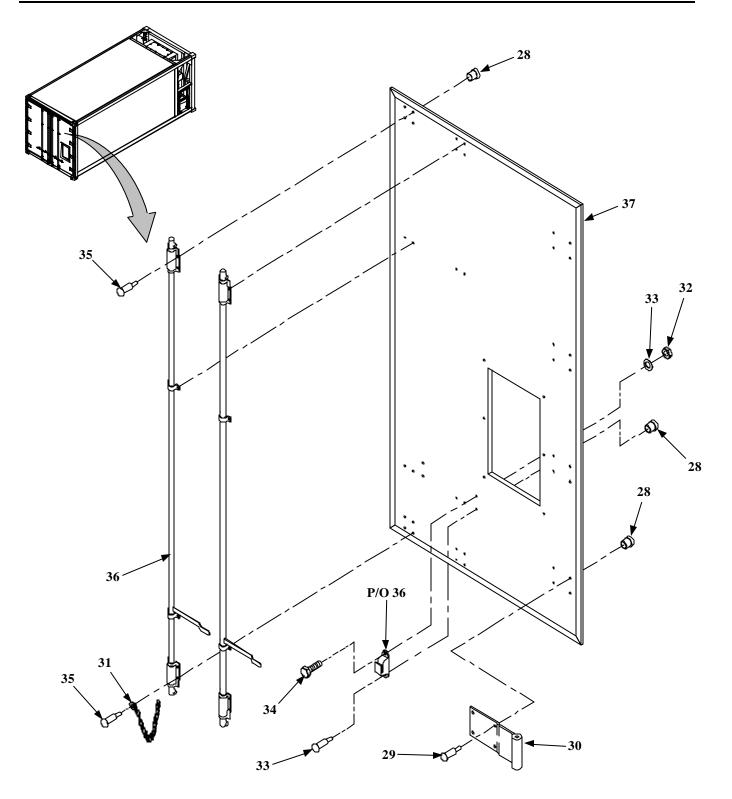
Right Hand Door Assembly (Sheet 4 of 4)
